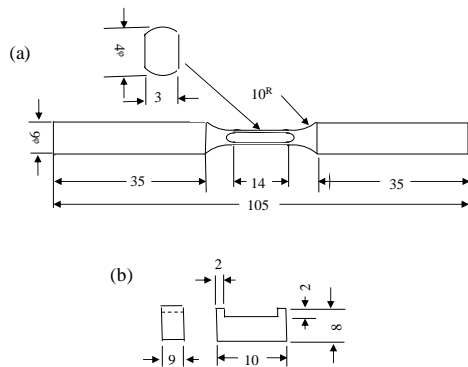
Configuration of fretting fatigue specimen (a) and fretting pad (b).
